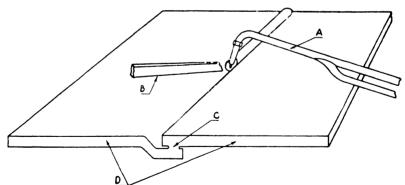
Torch soldering; City gas-oxy.: A. Torch, B. Solder, C. Spot welded point, D. Base metal
